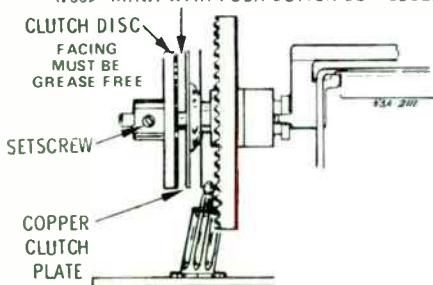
CLUTCH ADJUSTMENT DETAIL
